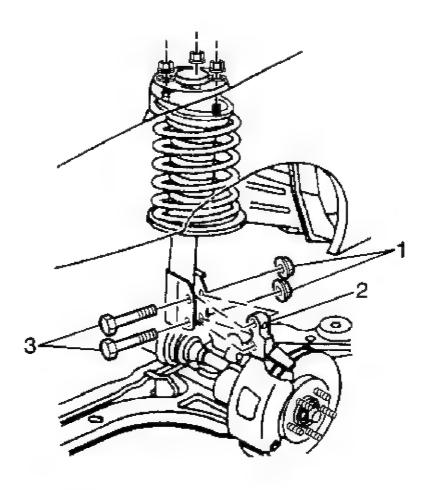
Removing/Installing Strut Courtesy of GENERAL MOTORS CORP.
